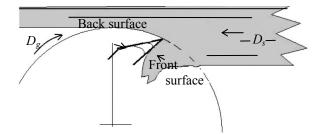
Layout of interaction of cutting element of milling tool with material processed
